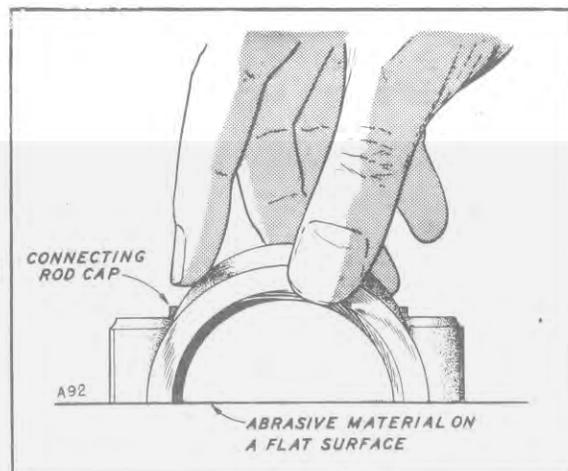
REDUCING CONNECTING ROD BEARING CLEARANCE
